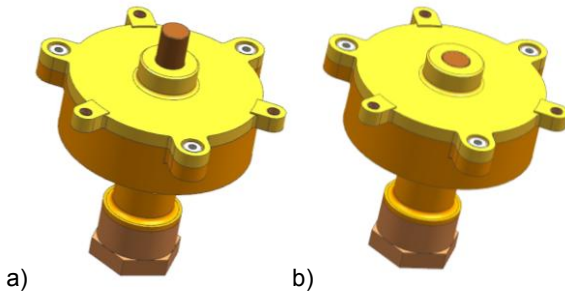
EM Design of the pin puller, a) locked position, b) unlocked position
